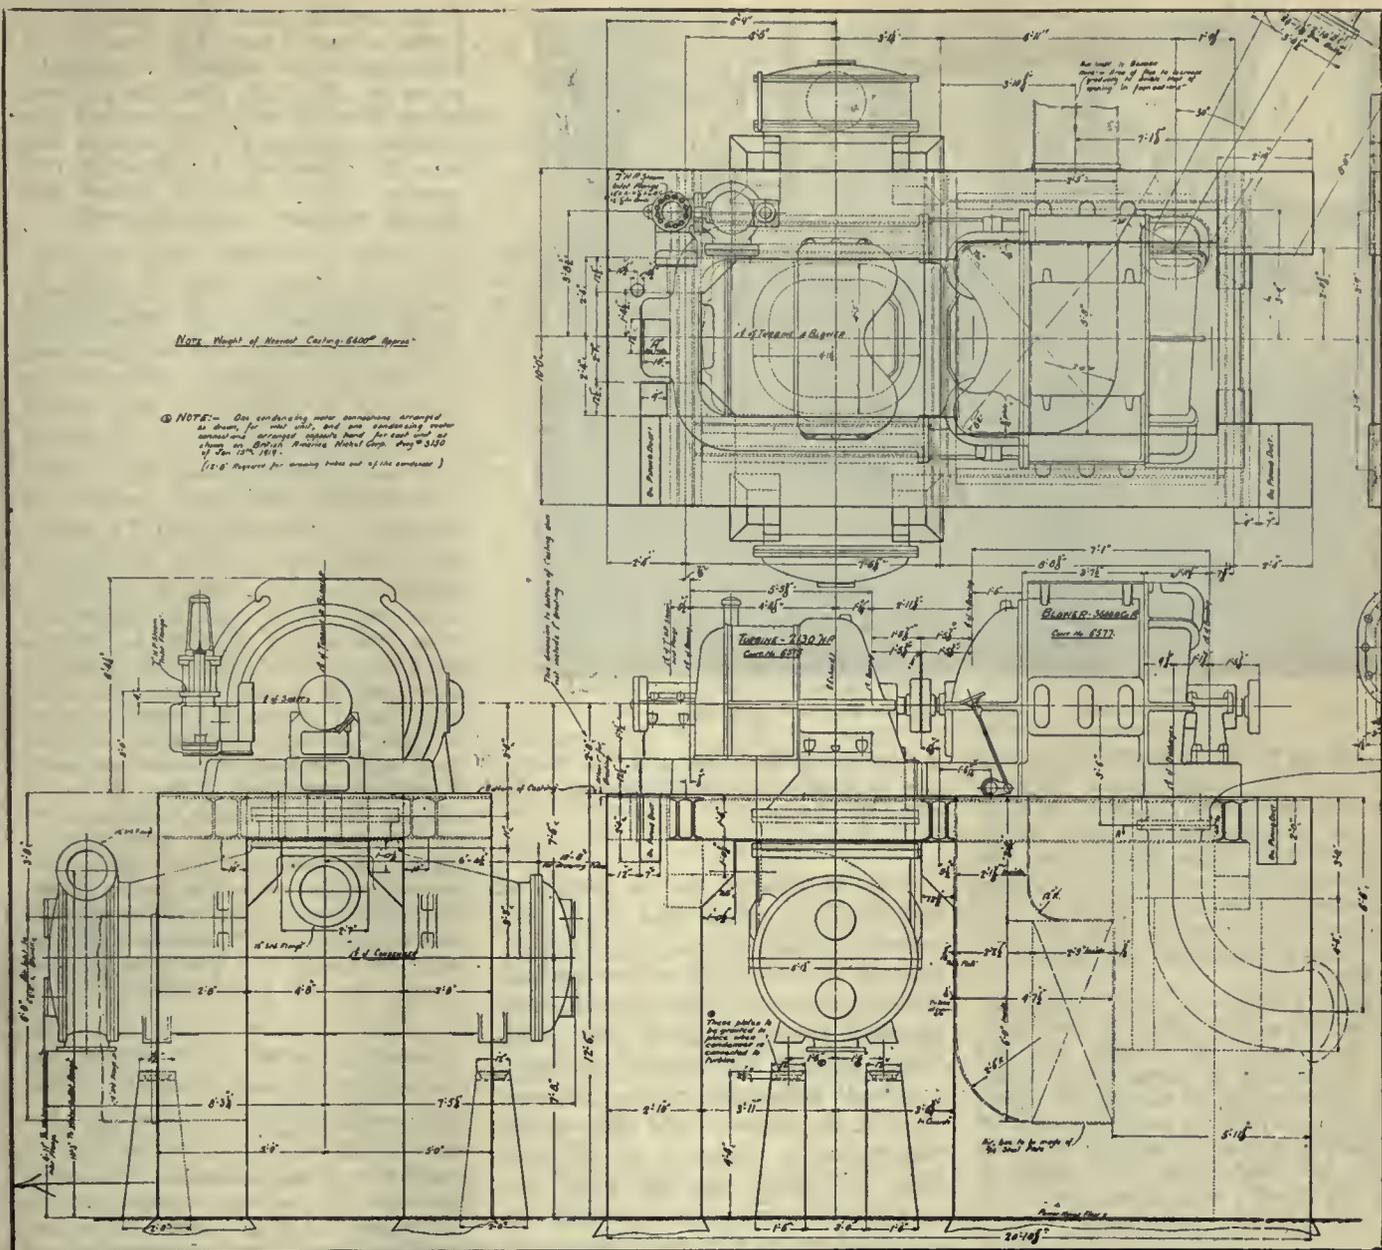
LAYOUT OF DIRECT CONNECTED TURBINE AND MULTI-STAGE BLOWER.
